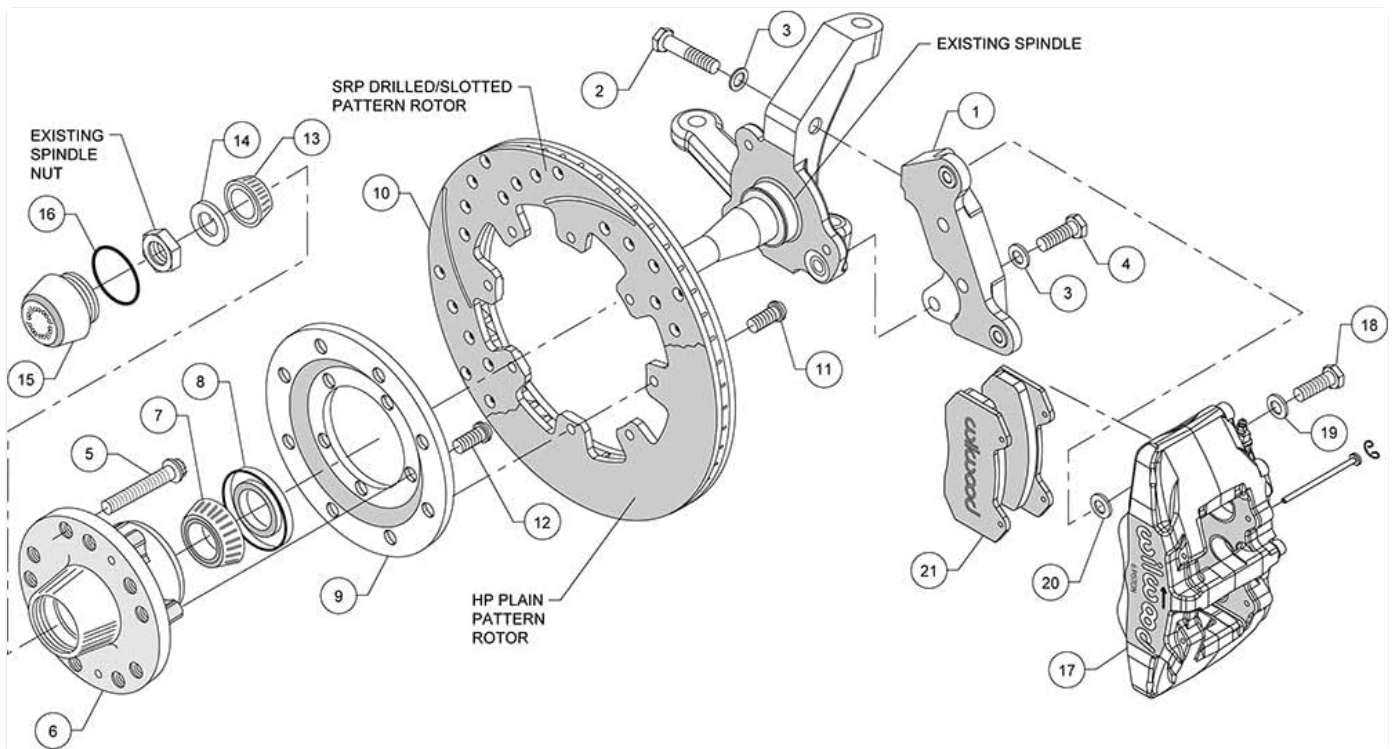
Exploded Diagram of Wilwood Forged Dynapro 6 Big Brake System. This technical drawing illustrates the individual components and their assembly order, including the existing spindle, hub, rotor, caliper, and mounting hardware with numbered parts for reference.
